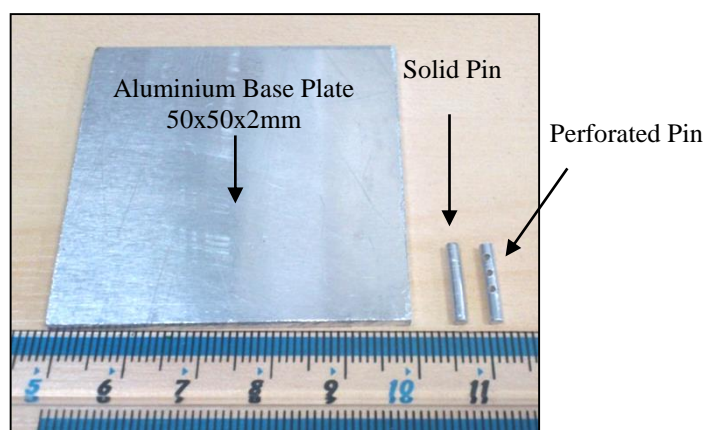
Aluminium base plate with solid and perforated pin fins
